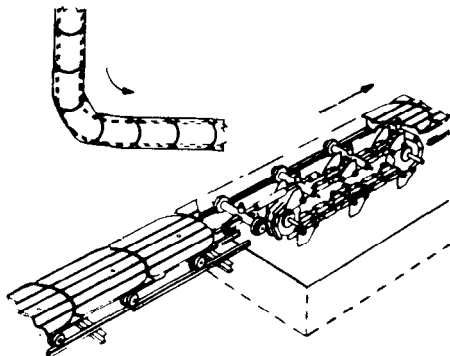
CIRCULATING PLATE/TRAY CONVEYOR HORIZONTAL
